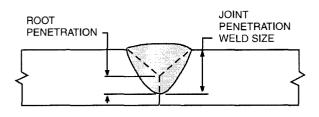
Incomplete Joint Penetration or Partial Joint Penetration
